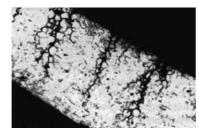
Intergranular stress corrosion cracking on a cold strip made of austenitic steel. Sectional view (50-fold enlargement).
